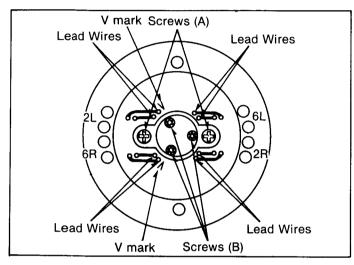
Replacement of Upper Cylinder Unit-(1)
